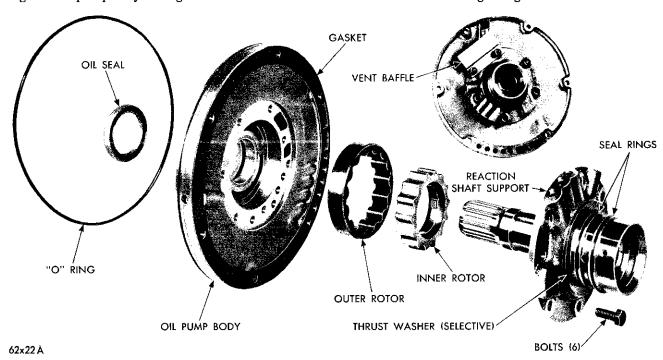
Front Oil Pump and Reaction Shaft Support (Disassembled)
